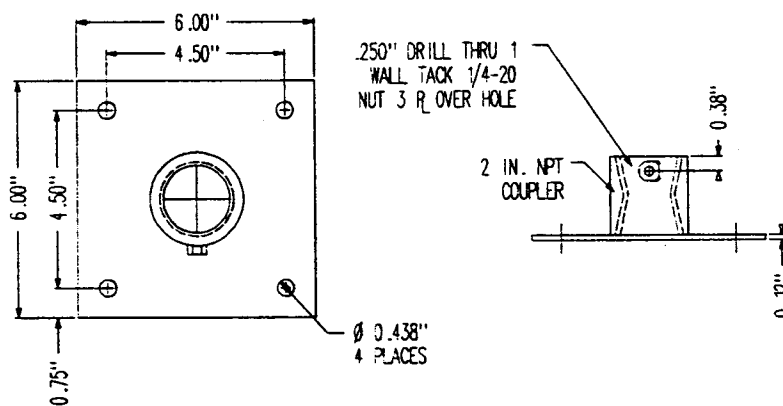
AMPRO 3600 CEILING MOUNT DIMENSIONS.
